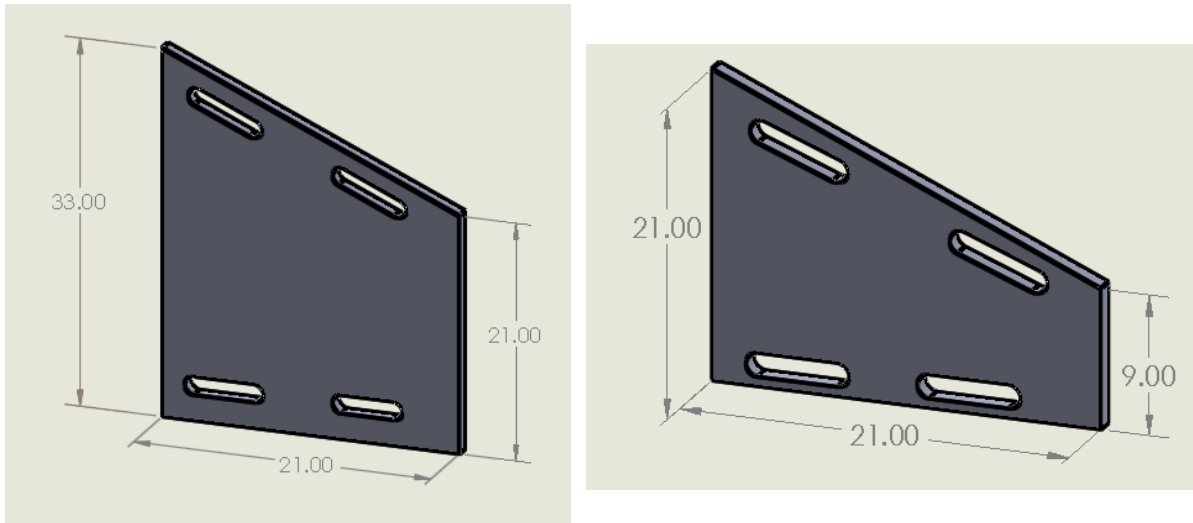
Back (left) and Front (right) side panels of final design. Dimensions in inches.
